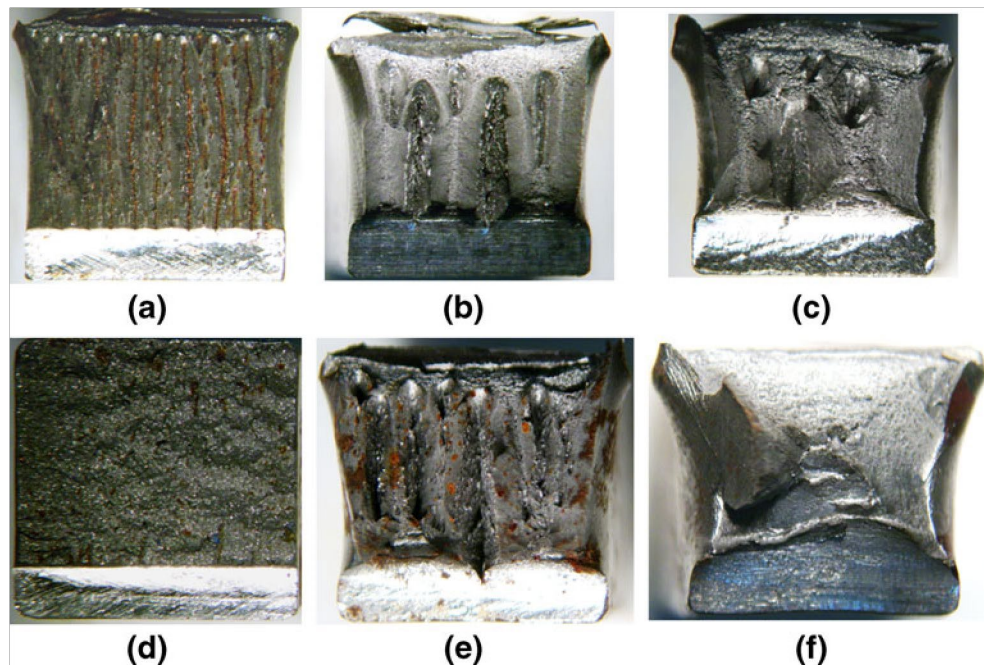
Macrographs showing the fracture surfaces of the S460 ML CVN specimens. As received condition: (a) -150 °C, (b) 40 °C, (c) 140 °C.
